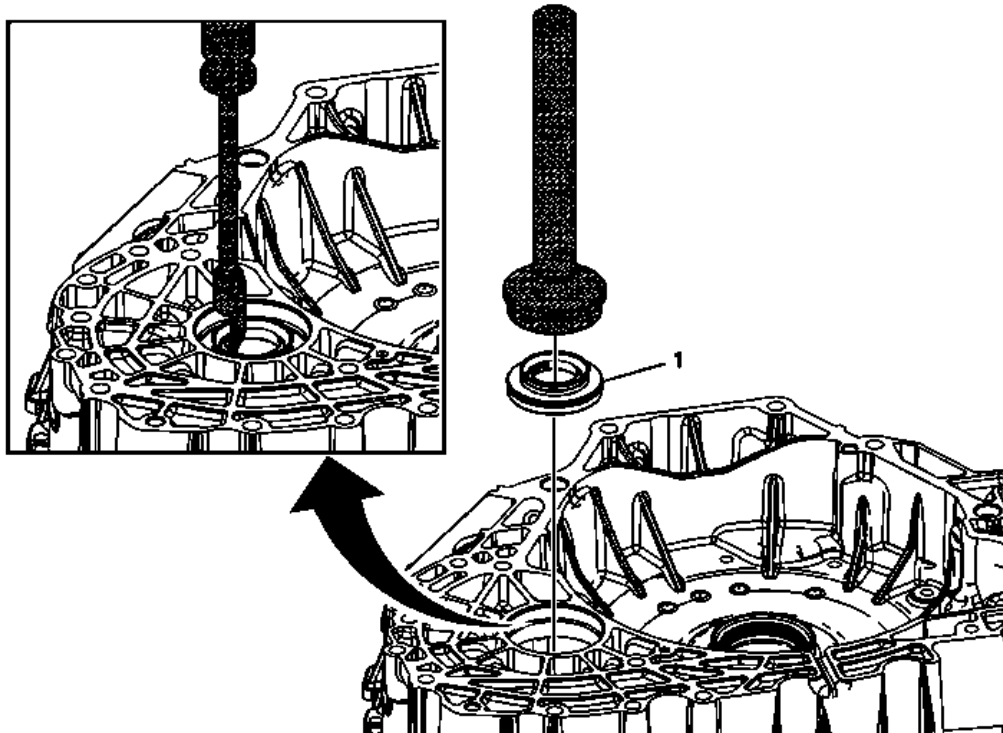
Front Wheel Drive Shaft Seal - Torque Converter Housing Side
